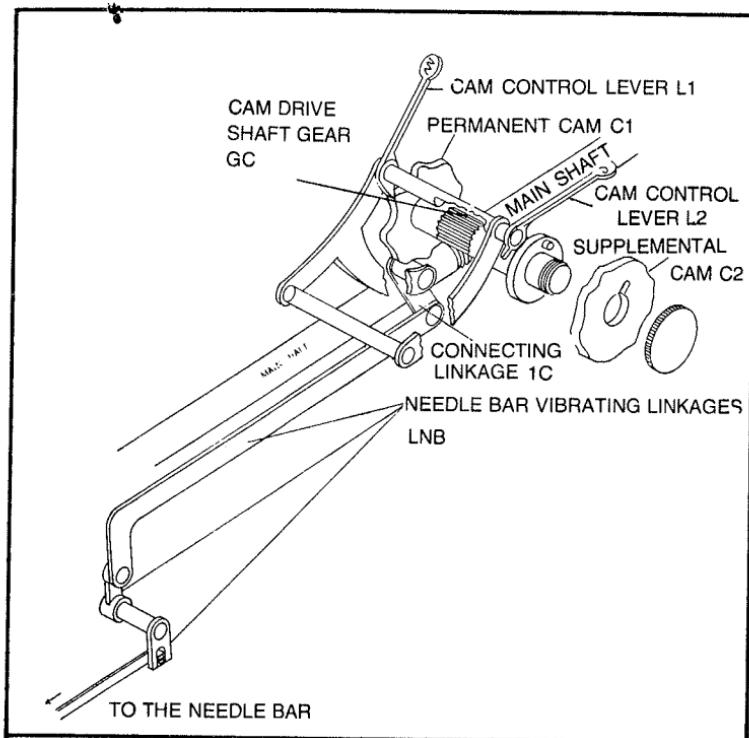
This sketch, developed from a Singer 319W, will give you a basic idea of how and why the needle bar swings from side to side when the machine is set for zig-zag stitching. On some machines (notably certain Pfaff Models), the zig-zag mechanism can be removed from the machine as a unit.
